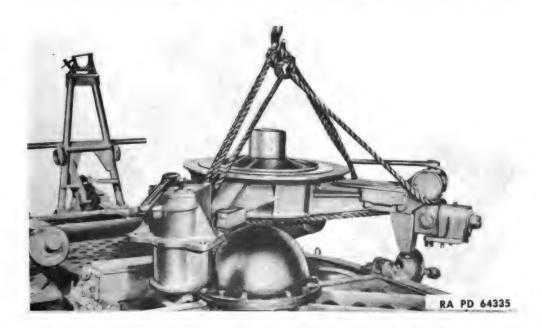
Lifting Leveling Mechanism from Lower Carriage
